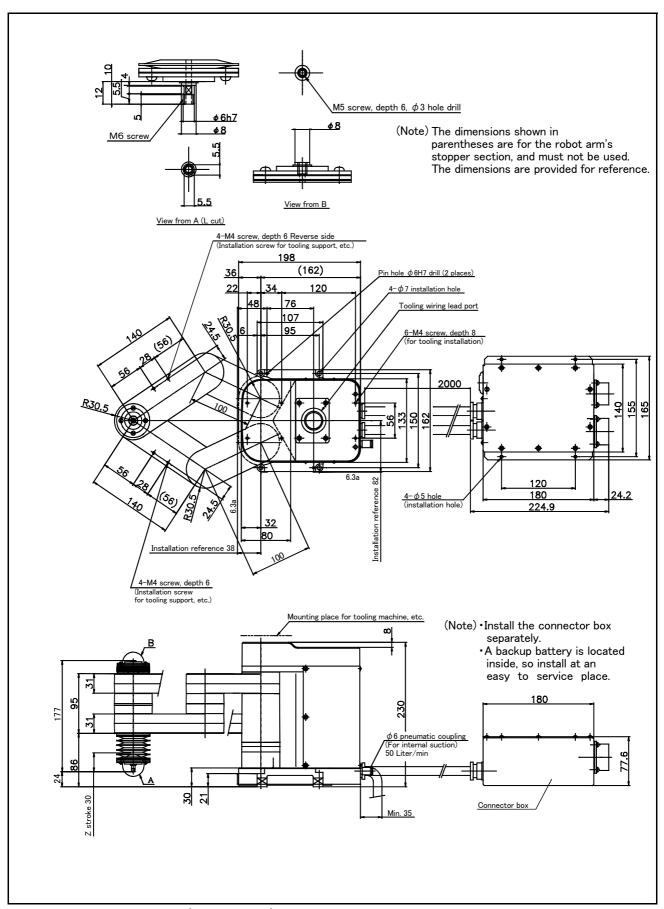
Outside dimensions(RP-1AHC-SB)
